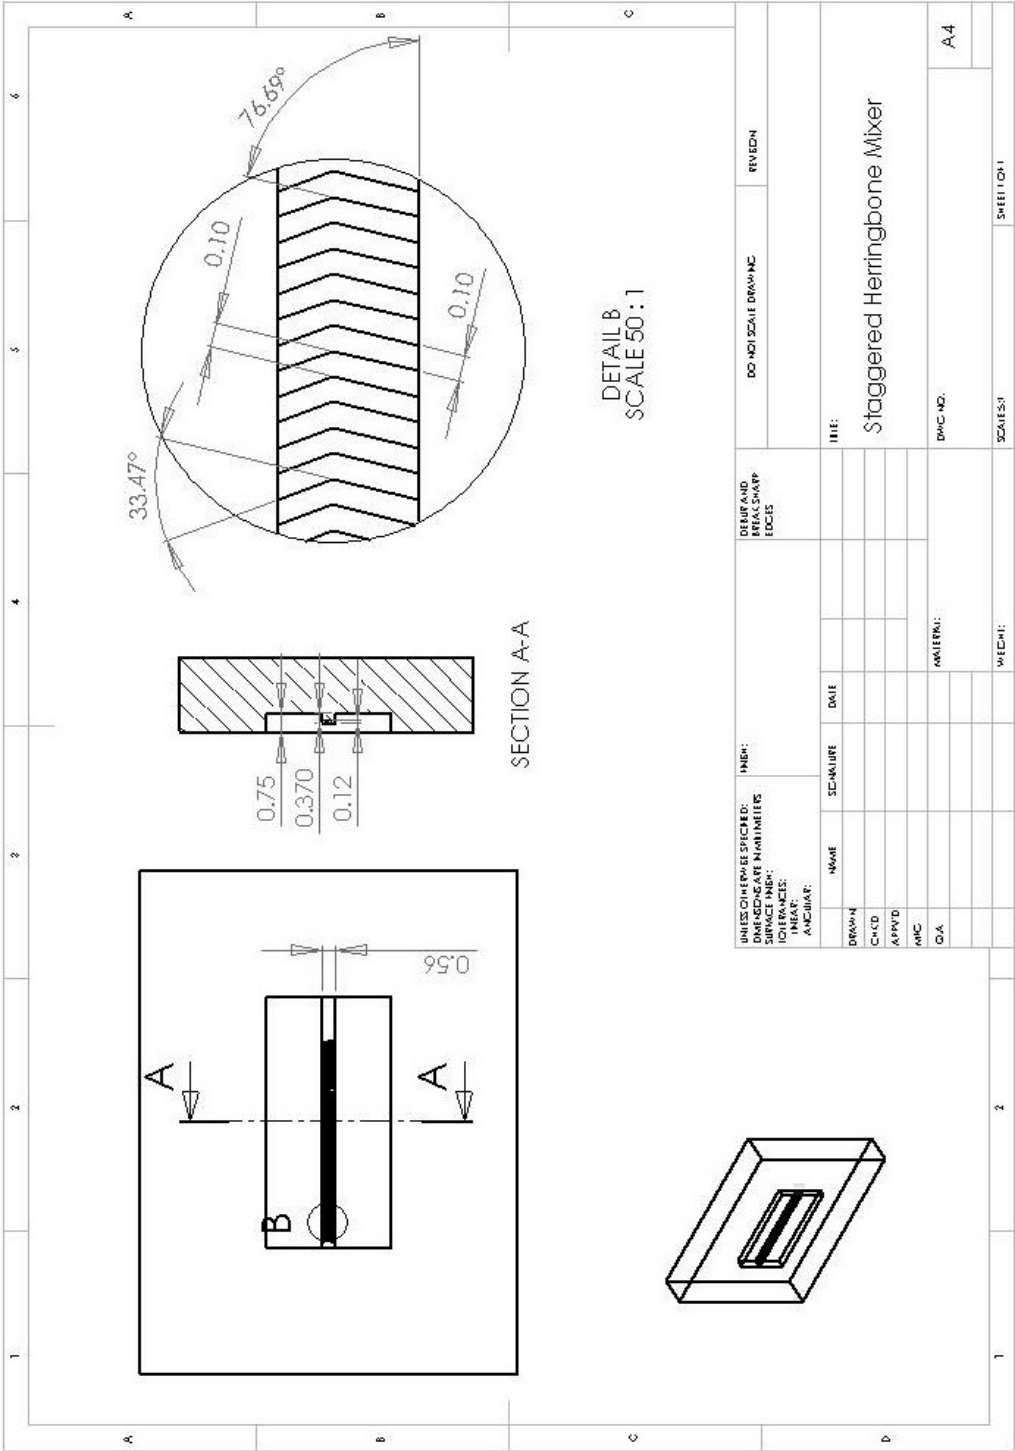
Mould for staggered herringbone mixer - Jointly developed with Dr. B. O’Sullivan. Dimensions in mm.
